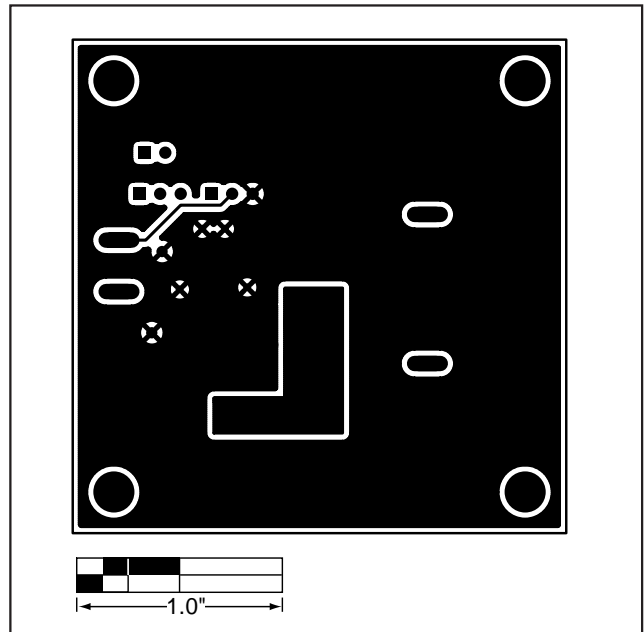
MAX668 EV Kit PC Board Layout—Solder Side
